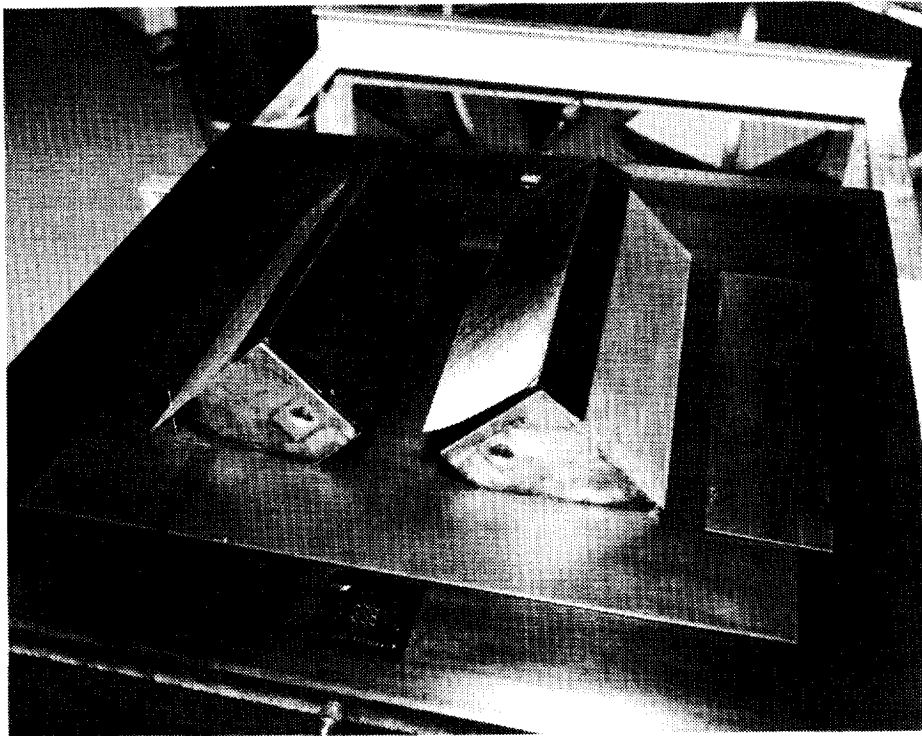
Blade L-Section Plies were Formed on Tooling Blocks to Form Web
